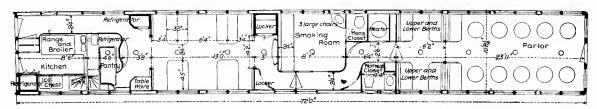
Floor Plan of Chicago, Burlington & Quincy Parlor-Café Car. Builder, The Pullman Company.
